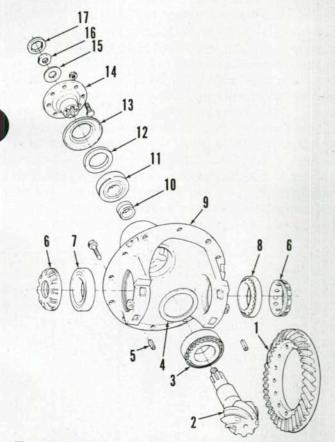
Exploded view of bevel drive gear assembly for APL-3054 type front axle.
